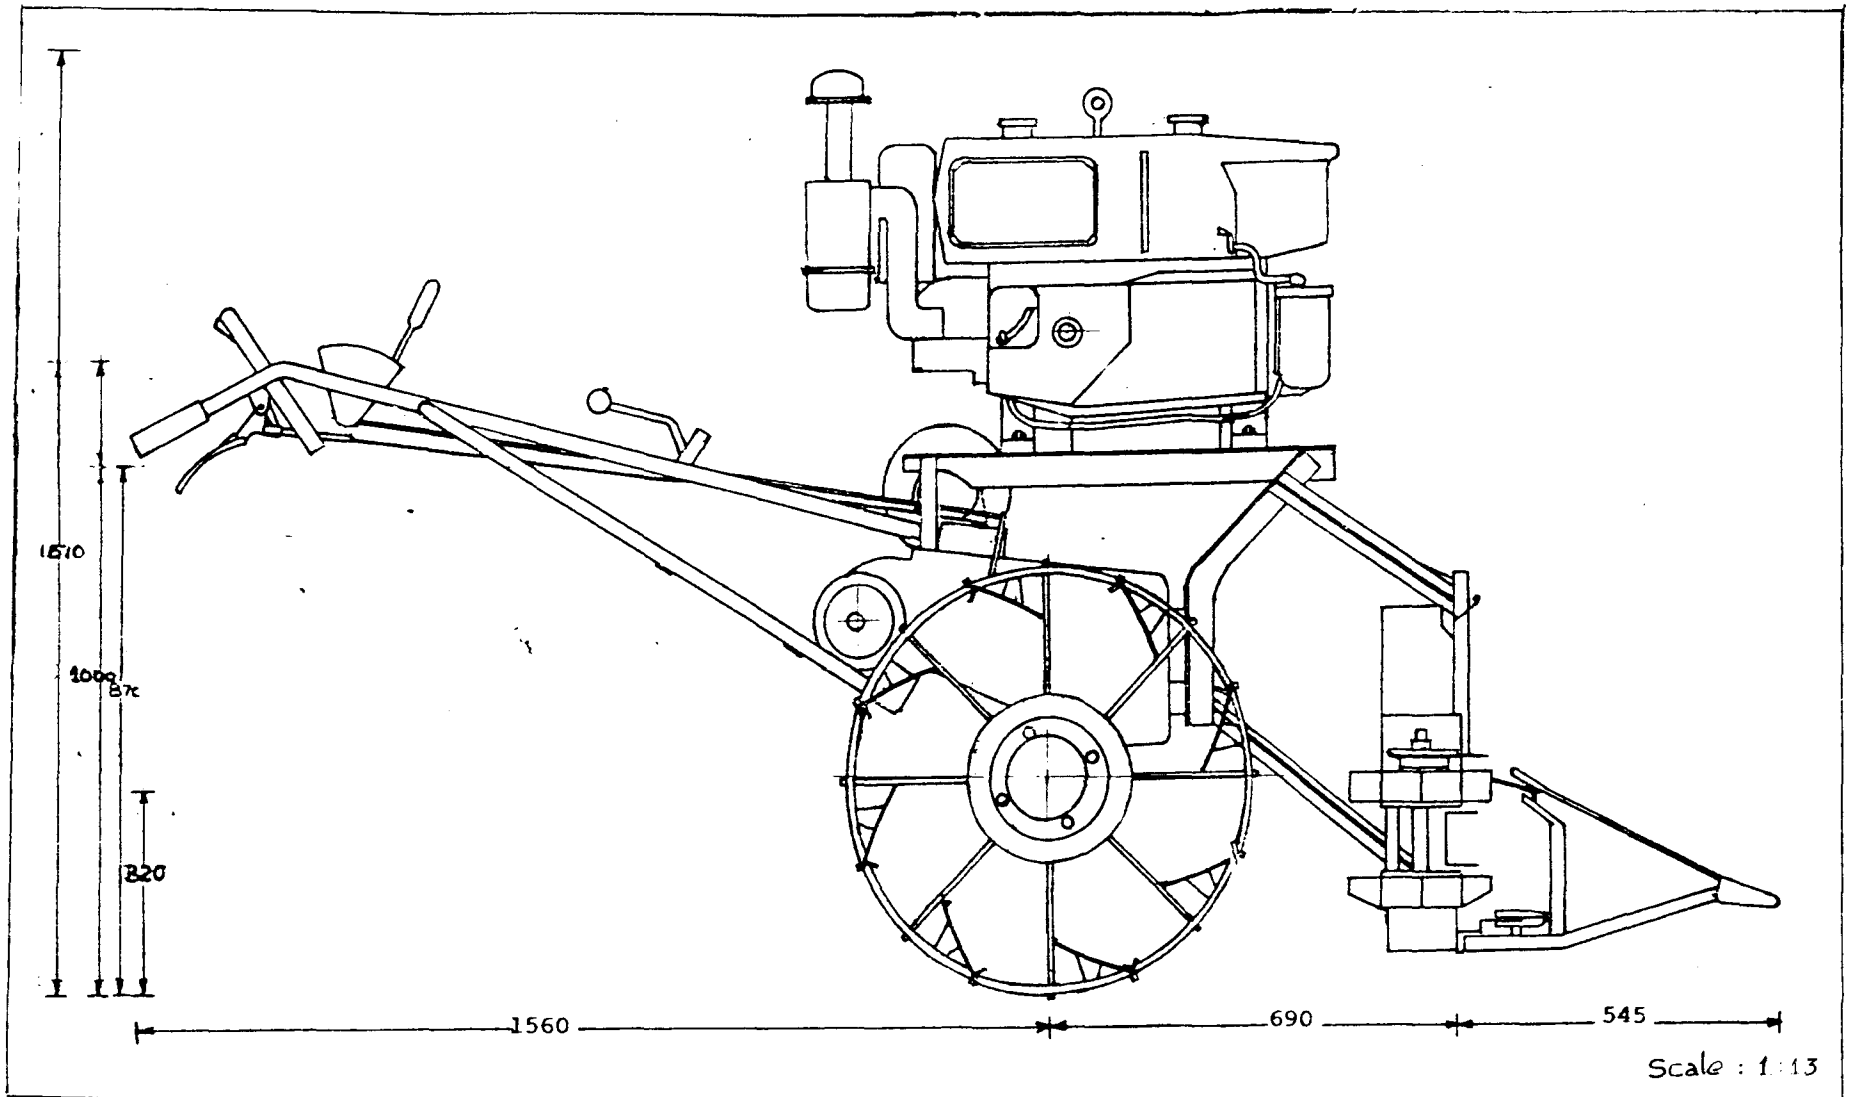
Assembled view of the KAMCO power tiller-mounted 1.6m vertical conveyor paddy reaper-windrower.
